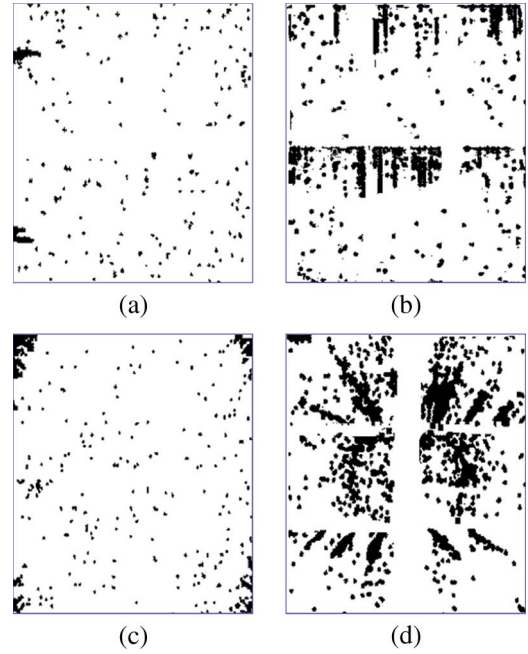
Four commonly seen defect types in the photolithography process. (a) Etching machine scratch. (b) Laser anneal issue. (c) Poor coating. (d) Flatness layer globule issue.
